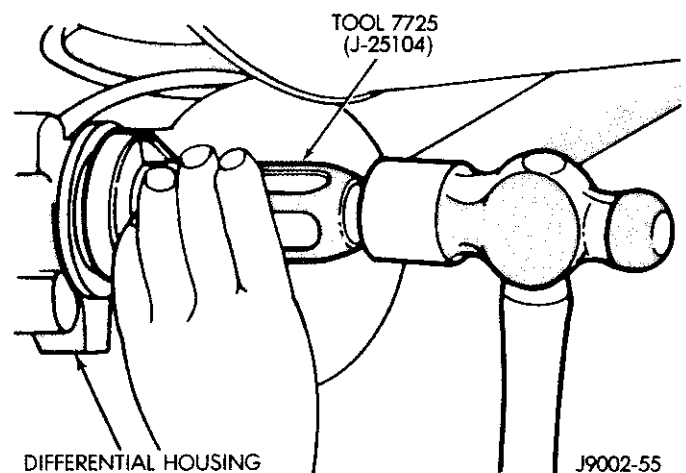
Drive Pinion Gear Shaft Seal Installation
